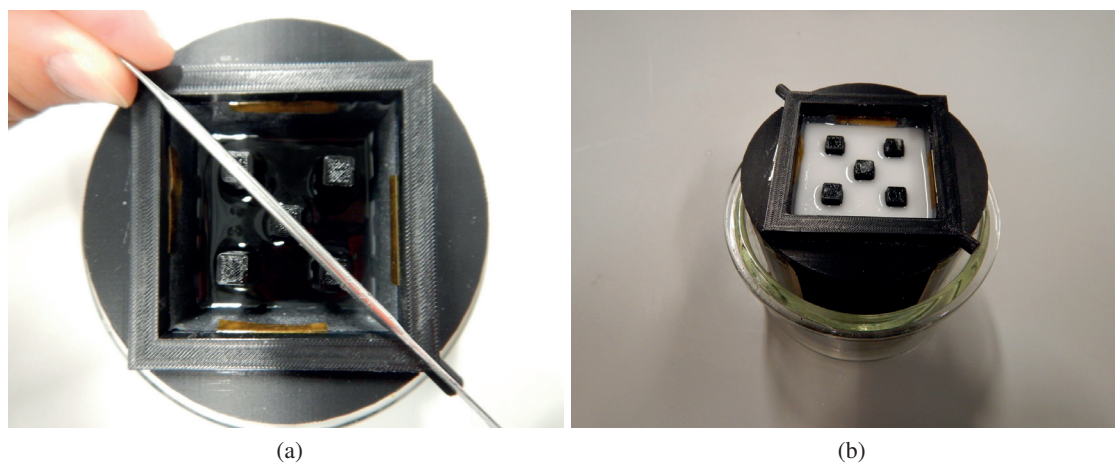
(a) Placing and centering of the preform inside the set-up and (b) mold fully shaped before draining
